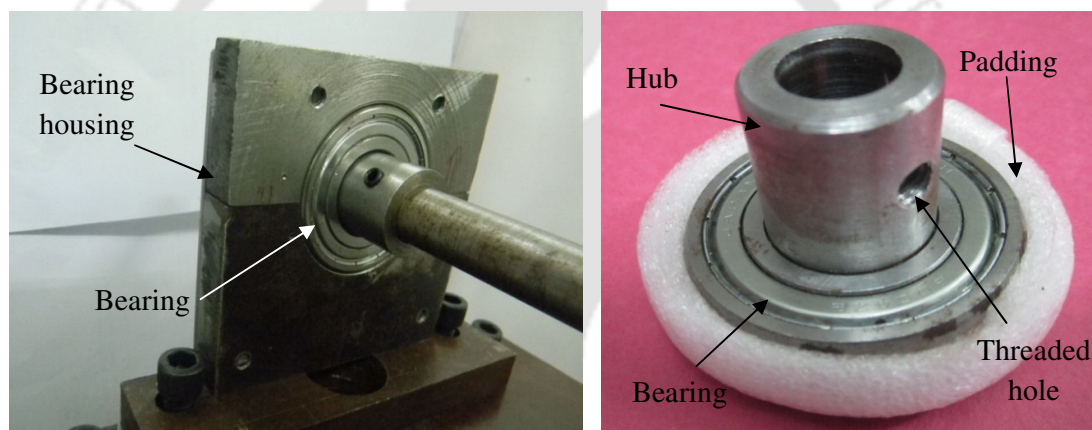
Close view of (left) bearing housing (right) rolling bearing with soft padding
